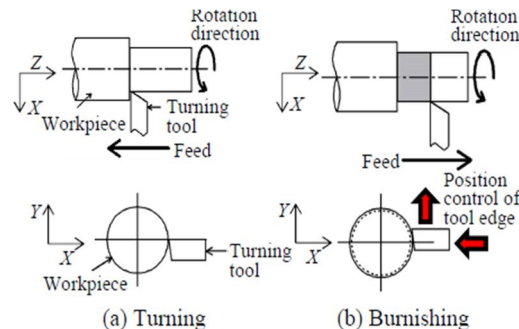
Schematic Diagram of Burnishing Method Utilizing Flank Face
